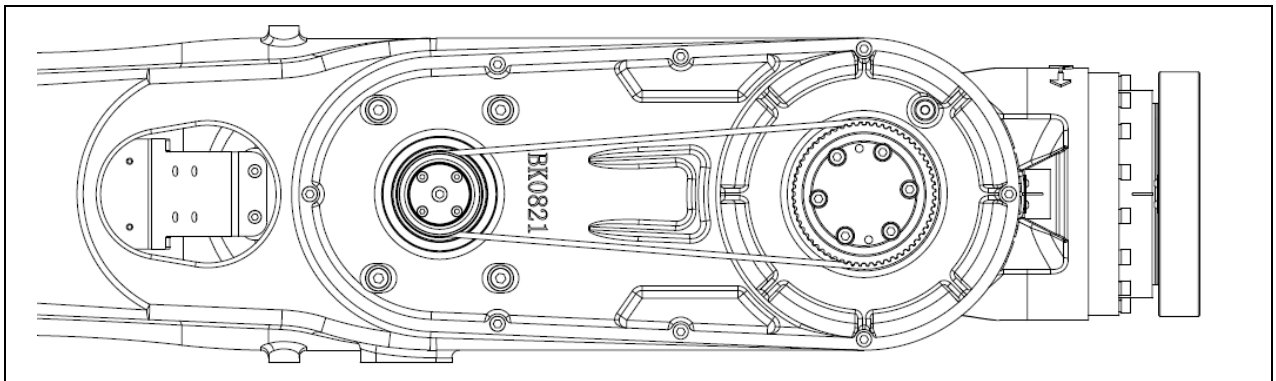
Straining the timing belt (ER220-3200, ER280-3200, ER280-3200-LI)
